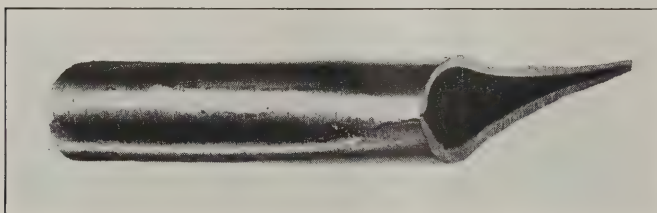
Photograph Showing Bend in $\frac{3}{8}$ in. Arc-Welded Monel Sheets. By Way of Test This Weld Was Purposely Bent Until It Just Cracked.
